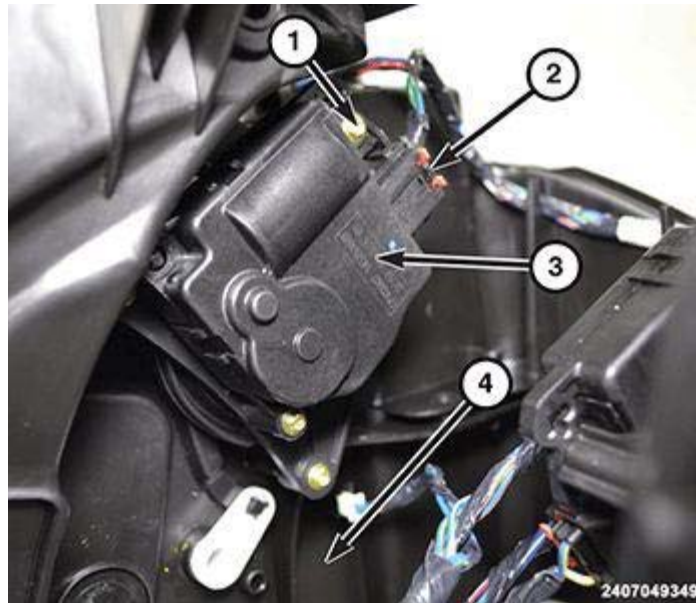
Blend Door Actuator, Distribution Housing, Wire Harness Connector & Screws
